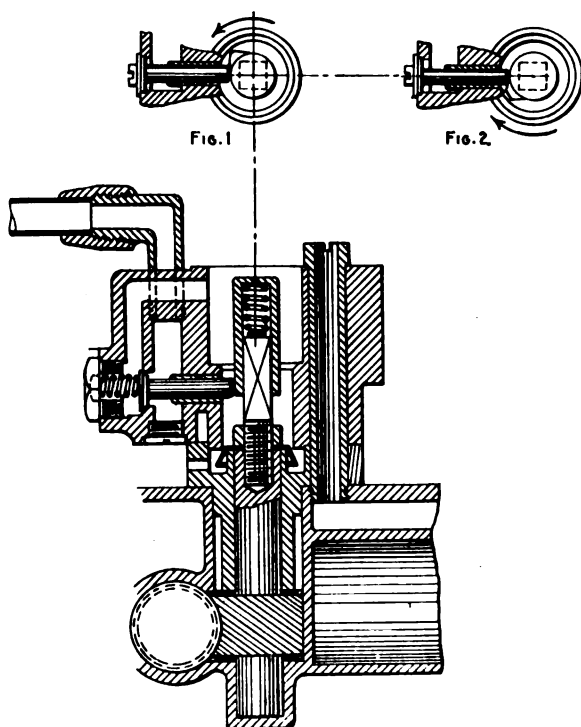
Christensen air-starter valve-actuating mechanism.
